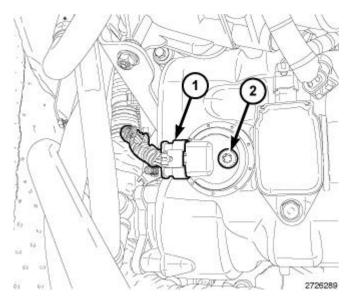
CMP Sensor & Bolt Courtesy of CHRYSLER GROUP, LLC
